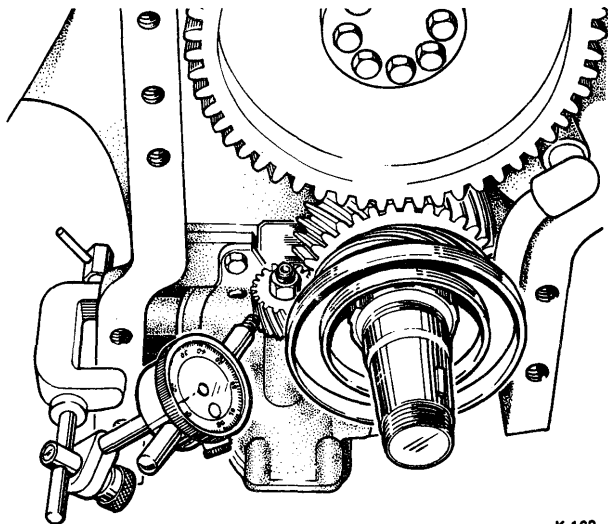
CHECKING GEARING BACKLASH ON THE OIL PUMP
